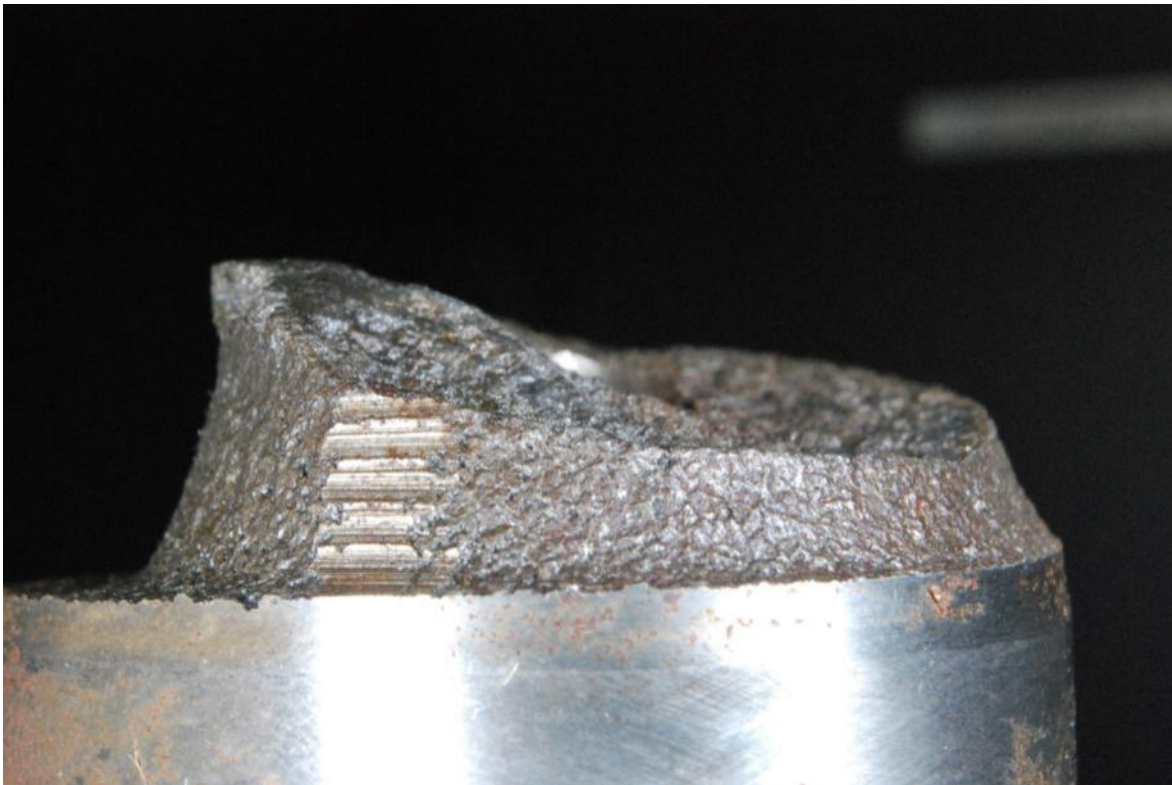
Callagher - Failed camshaft. The angle of fracture shows that the predominant loading was torsional.
